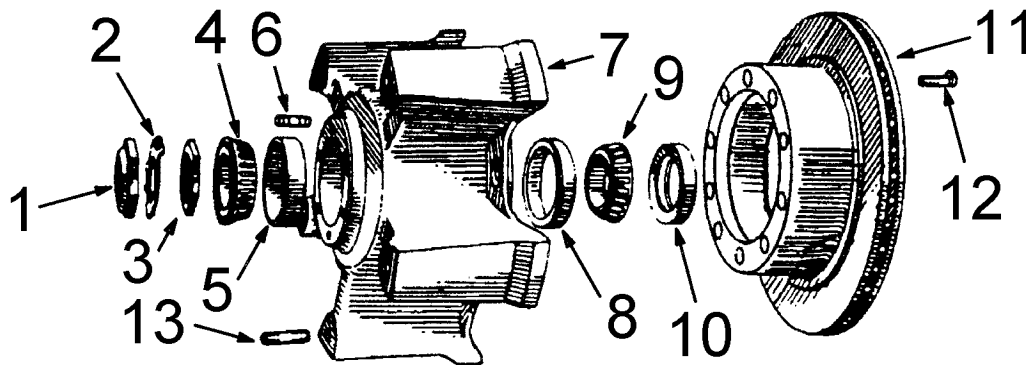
Remove Rear Rotor And Wheel Hub Assembly
